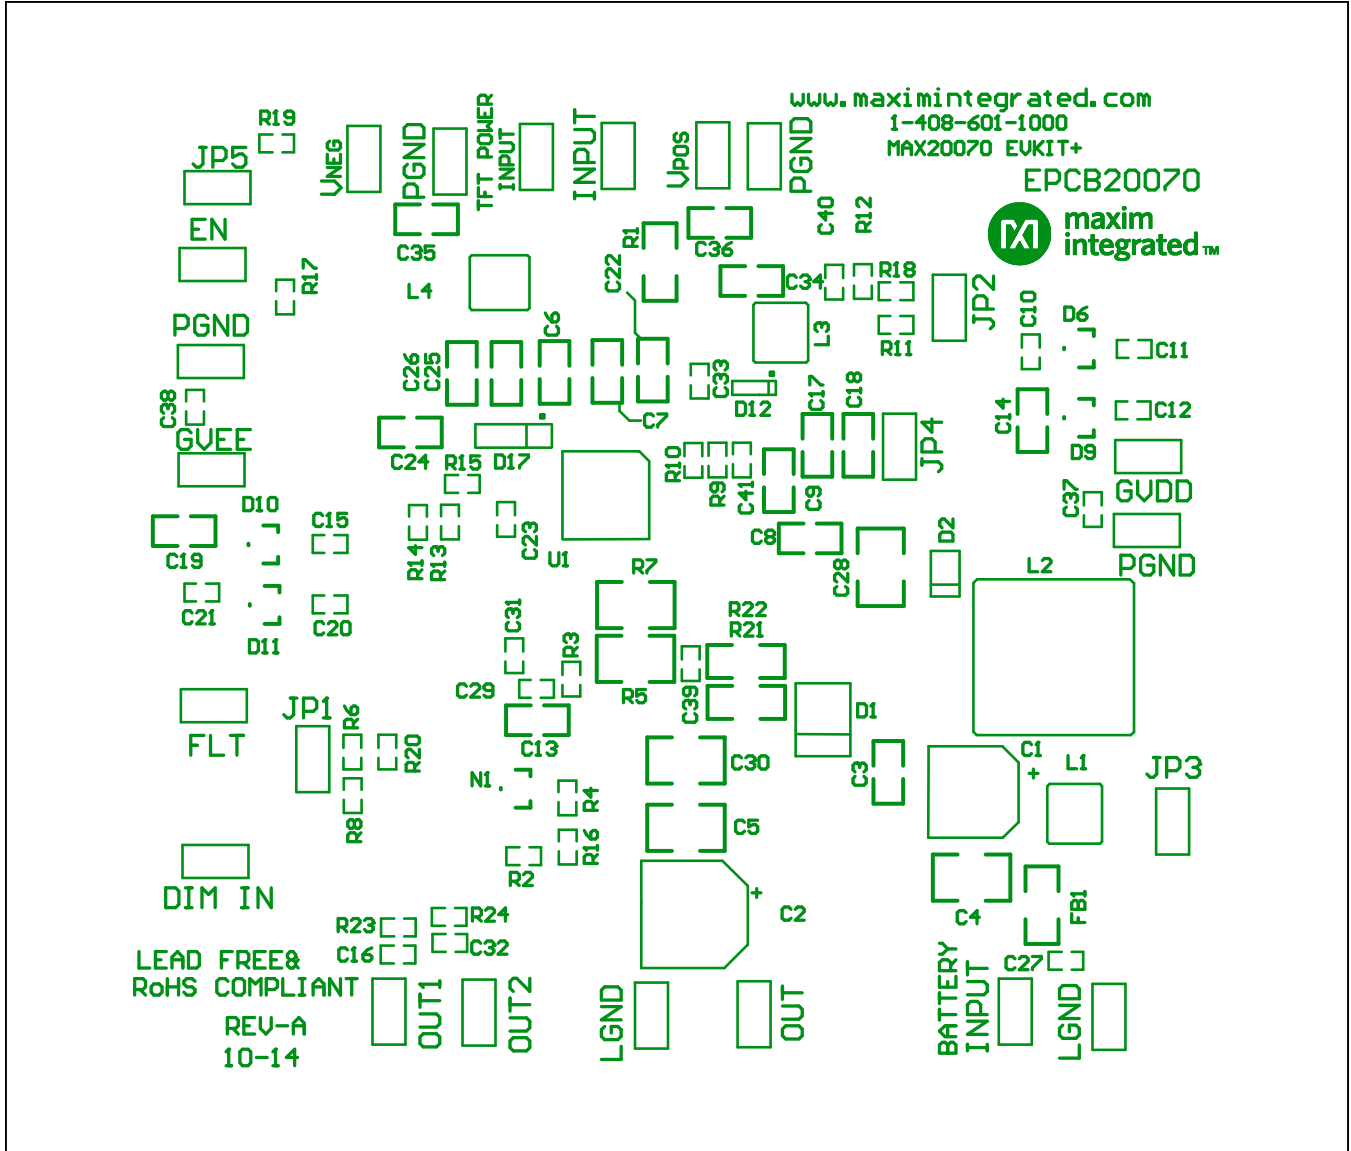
MAX20070 EV Kit Component Placement Guide—Component Side
